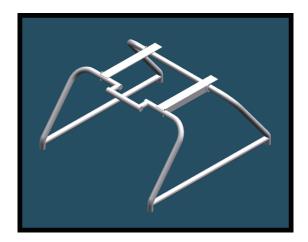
3-D View of Mobile Base in Solid Edge *.
